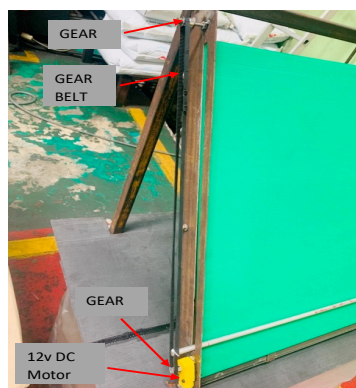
Assembly of gears, gear belt, and 12 V DC motor
